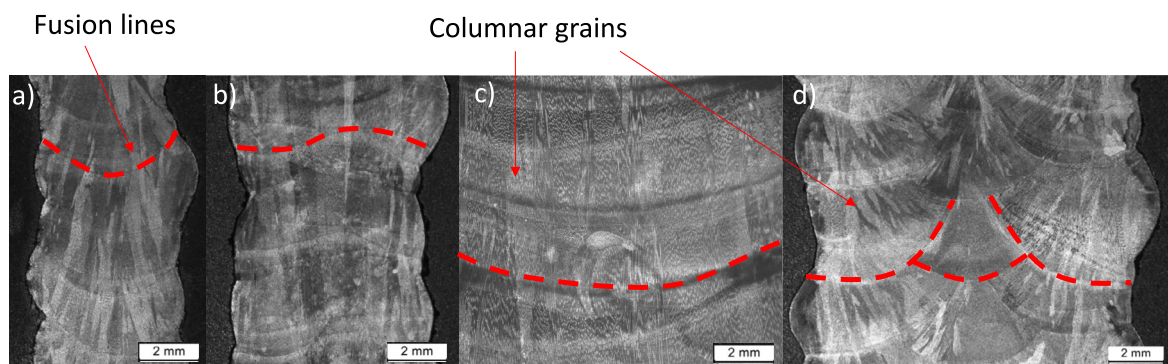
Cross section of WAAM walls after destructive testing: a single weld bead strategy wall, b circular single weld bead strategy wall, c meandering weld bead strategy wall, and d three overlapped weld beads strategy wall
